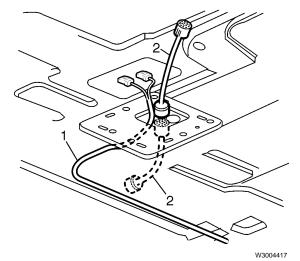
Bodybuilder Pass-through in Center of Cab Floor
